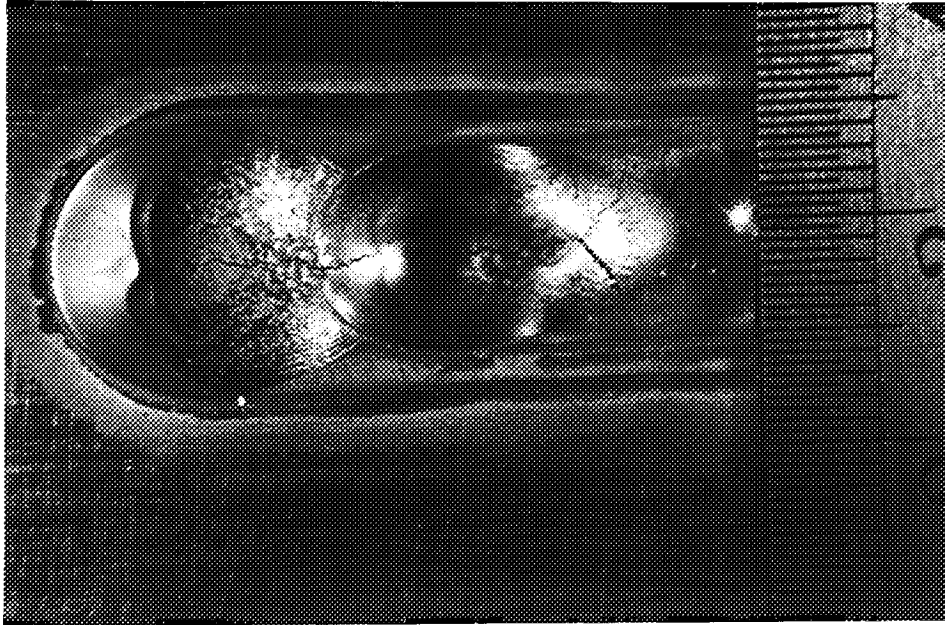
Surface of Al-Li Weld without Trailer.
